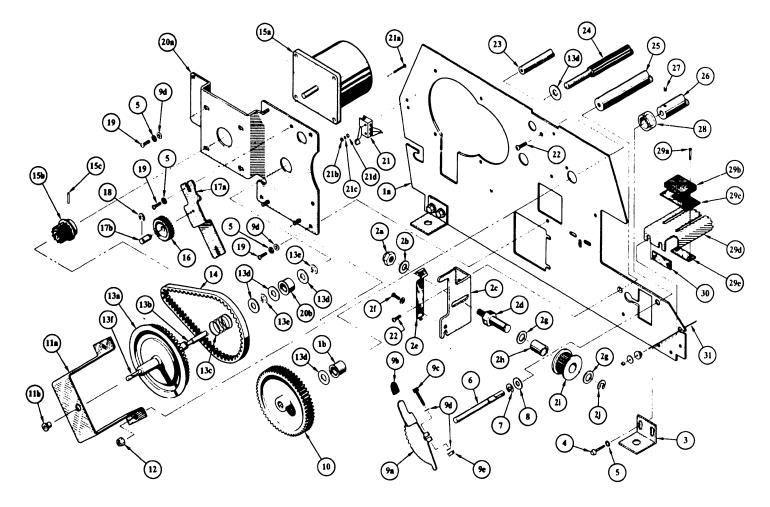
LEFT HAND SIDE FRAME ASSEMBLY
